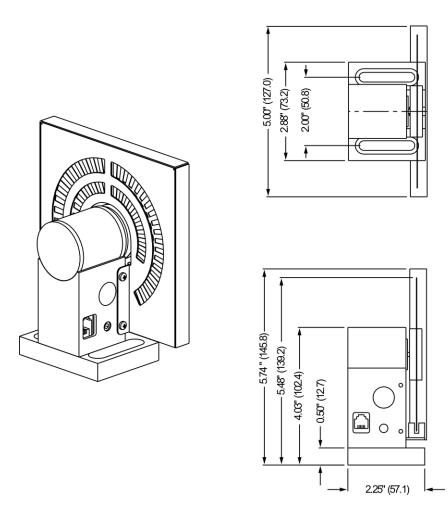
Dimensions of Model 3502 Optical Chopper Head. Dimensions in inches (mm).
